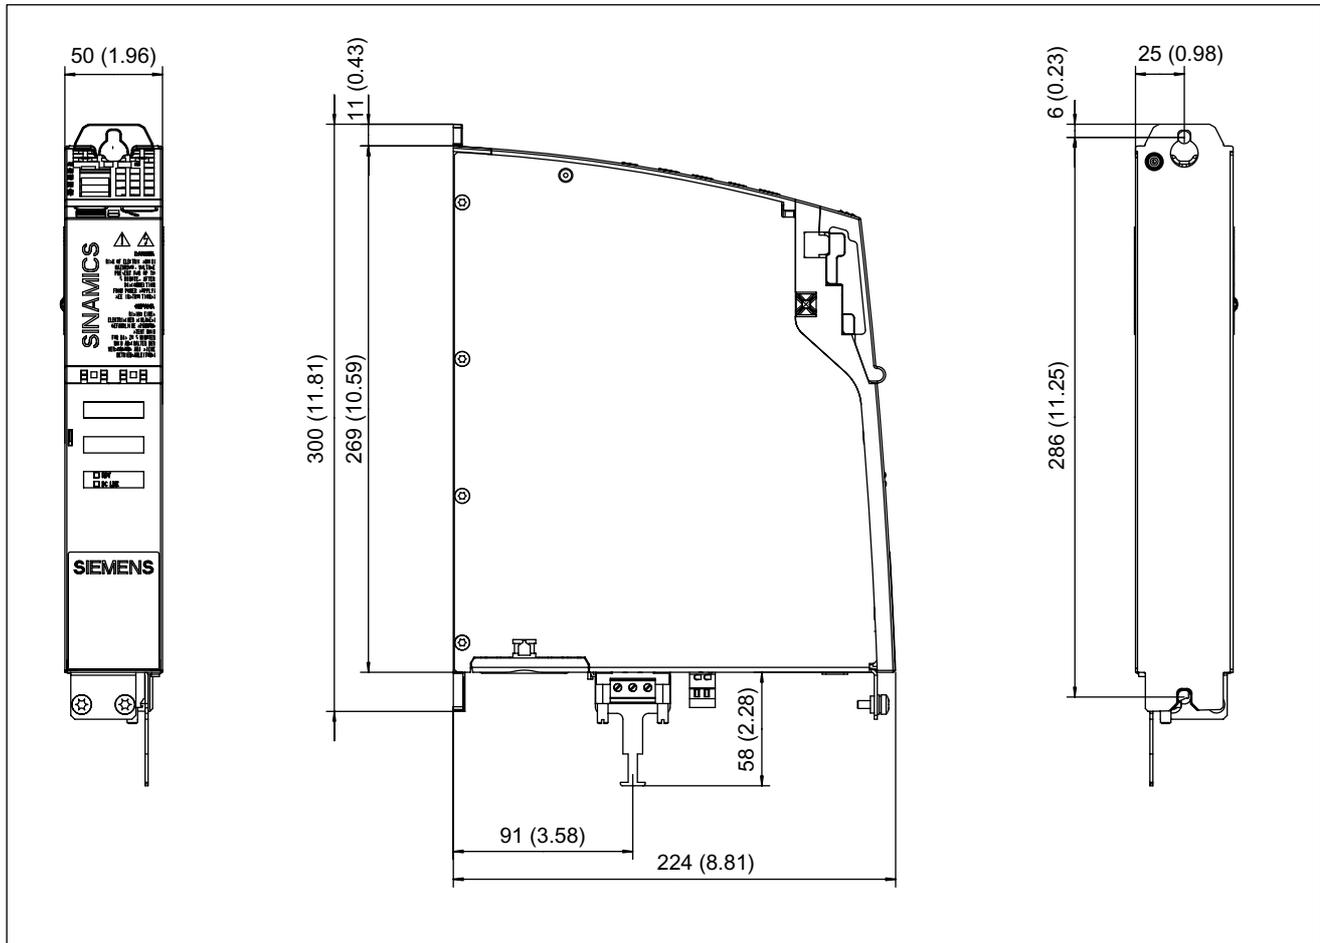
Dimension drawing of Motor Module in booksize compact format 3 A, 5 A, and 9 A, all dimensions in mm and (inches)
